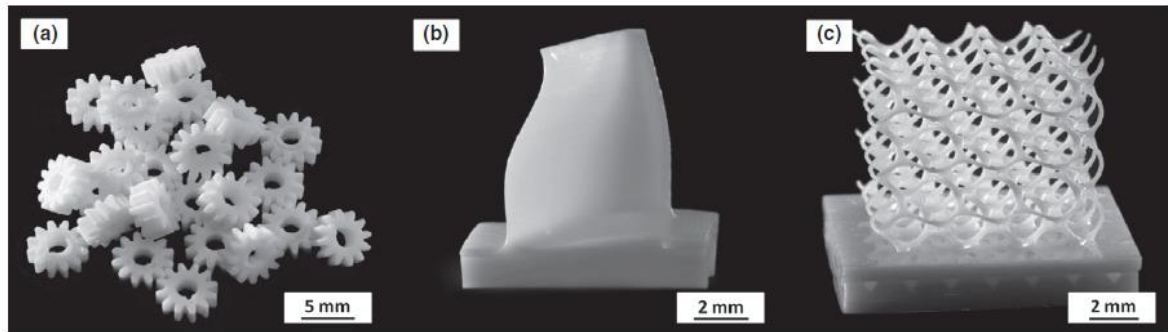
Sintered alumina parts fabricated using the LCM technique: (a) gear wheels; (b) a turbine blade; and (c) a cellular cube. [54]
